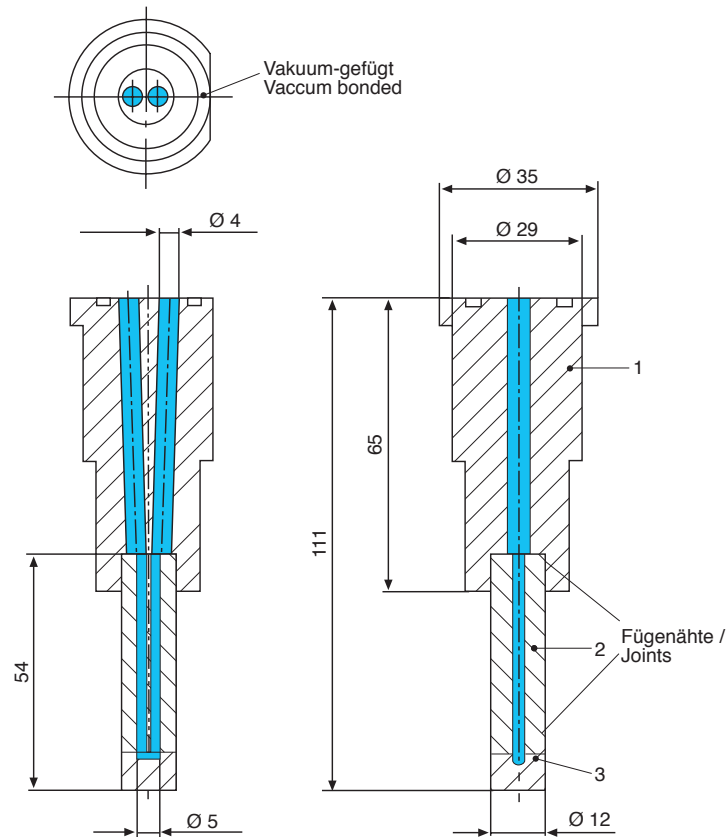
Optimized heating/cooling system for cores employing the joining technique;
